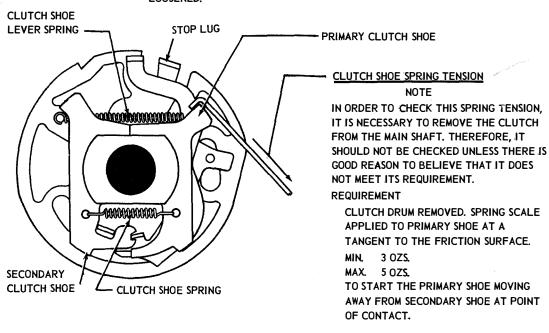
TYPING UNIT, CLUTCH MECHANISM LEFT SIDE VIEW
